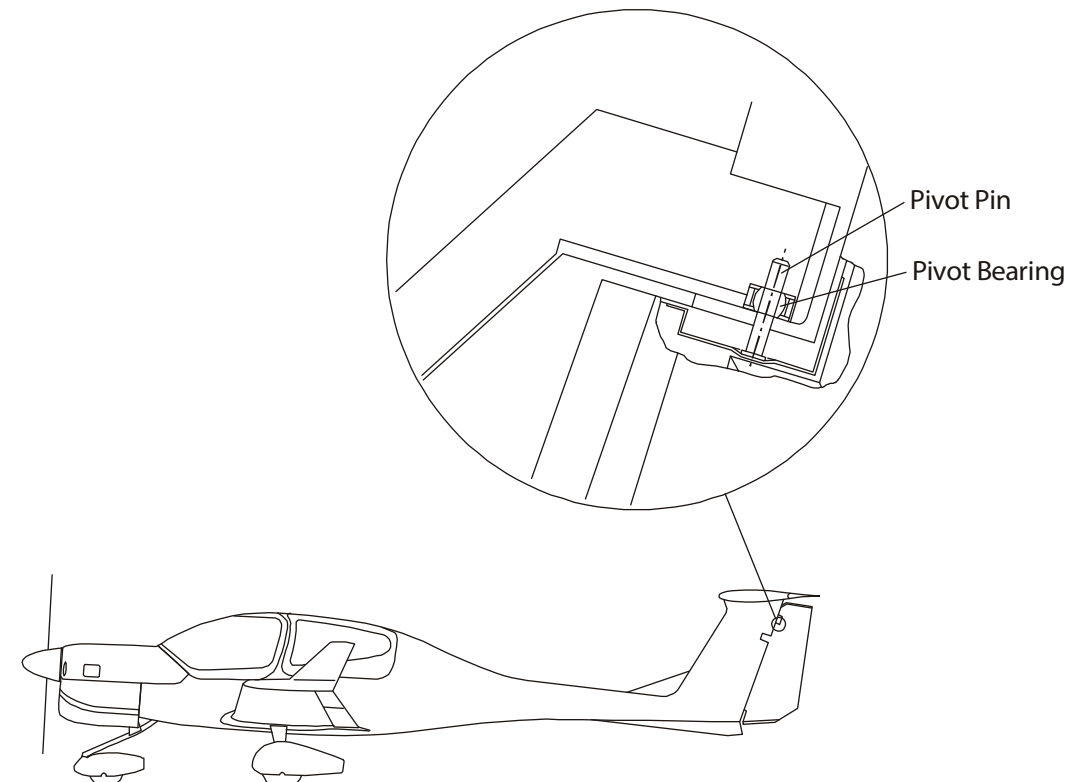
Clearance Bushing between the Rudder and Rudder Bearing
